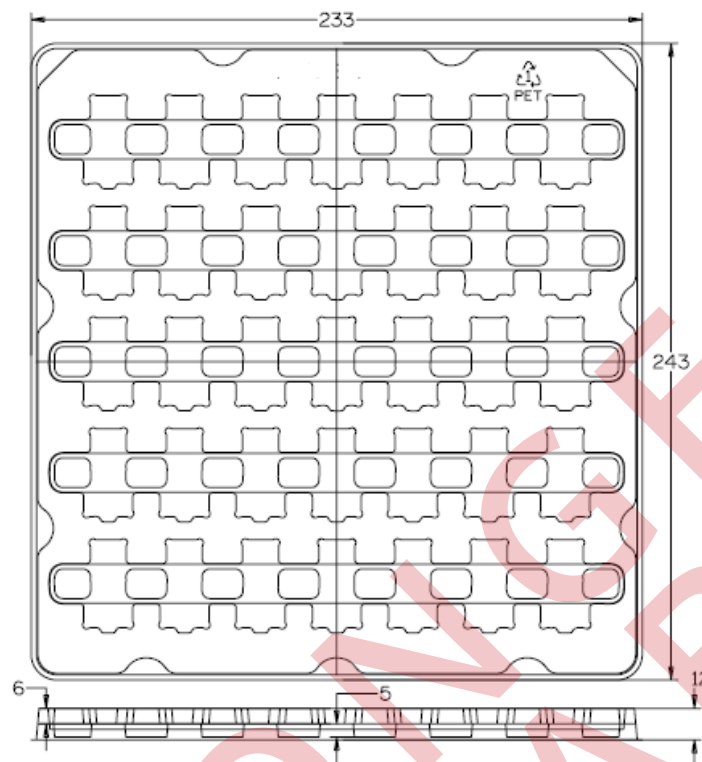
Package ray dimensions for LUXEON S3000 LXSx-Pxxx-0024(N).
